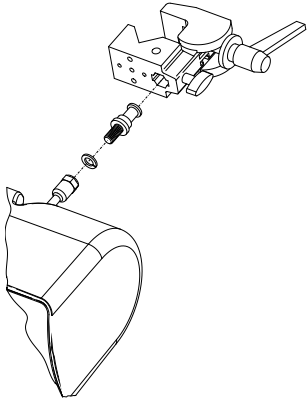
E6532 Super Clamp with E6533 M10 adapter for Super Clamp
